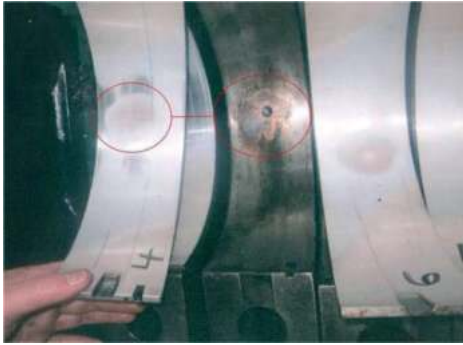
Fretting/corrosion and related imprint on shell
